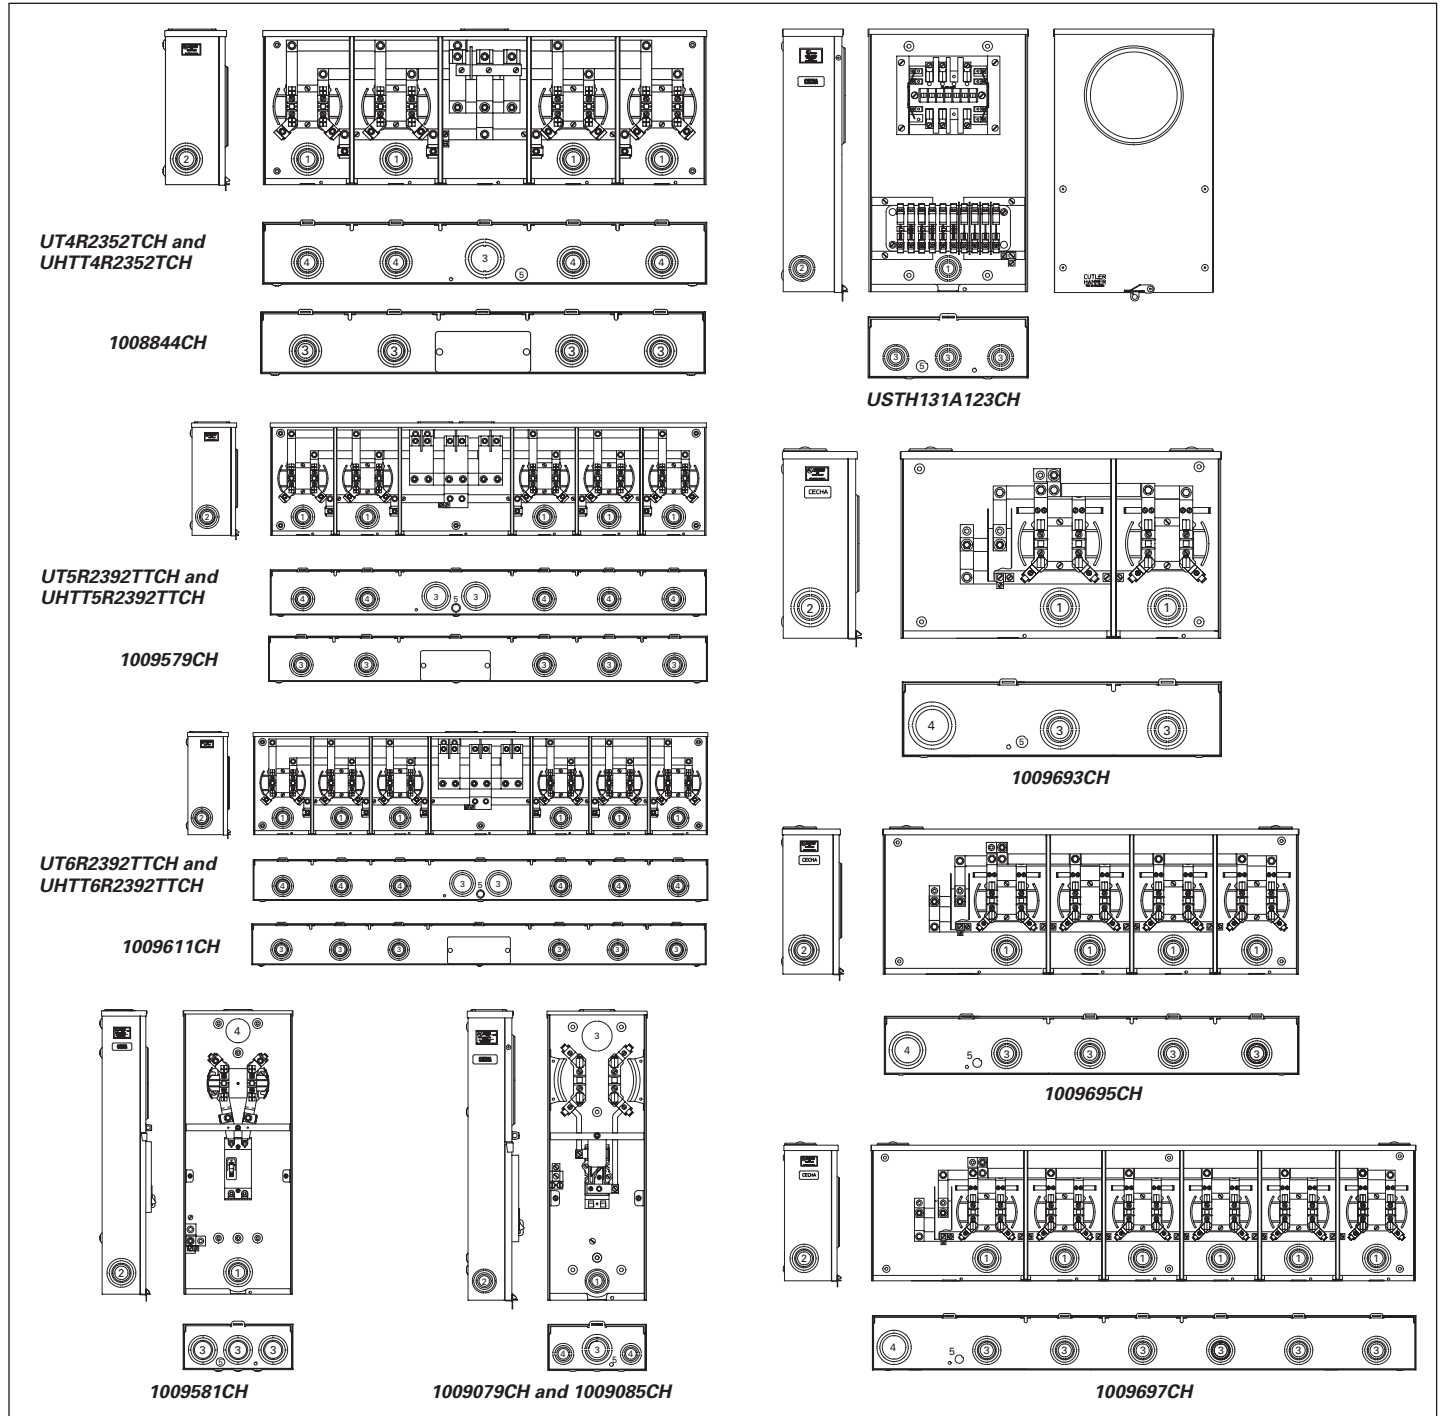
KNOCKOUT DRAWINGS — DRAWINGS NOT TO SCALE
